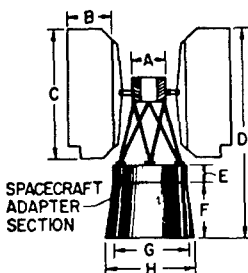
Principal dimensions of the 1/2-scale Nimbus model
